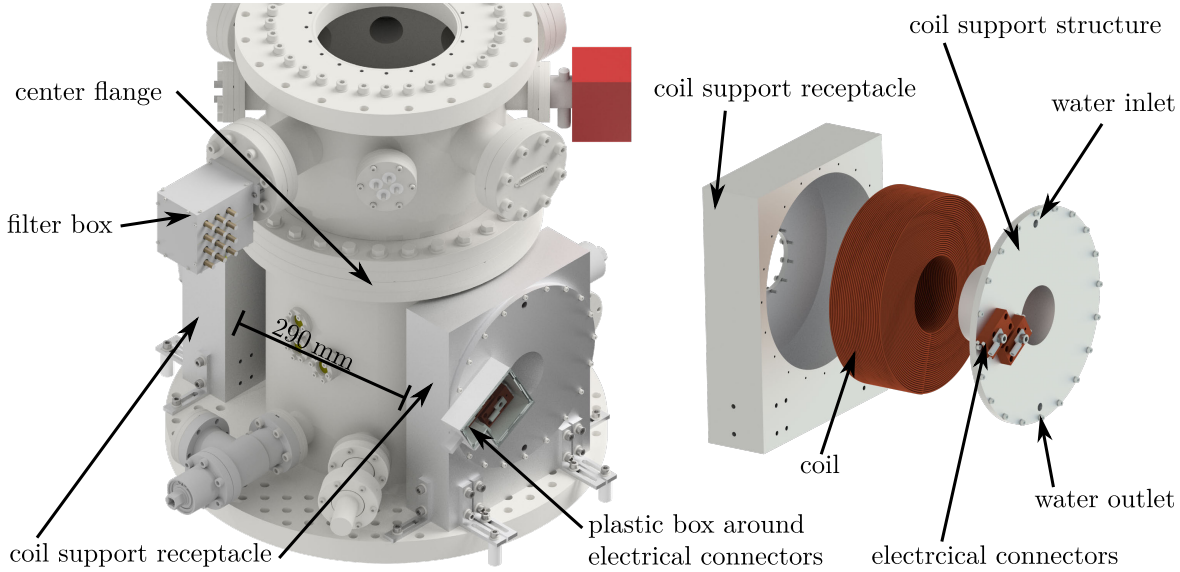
Magnetic field coils. Left: positioning relative to the outer vacuum chamber. Right: Explosion view of one coil assembly.
